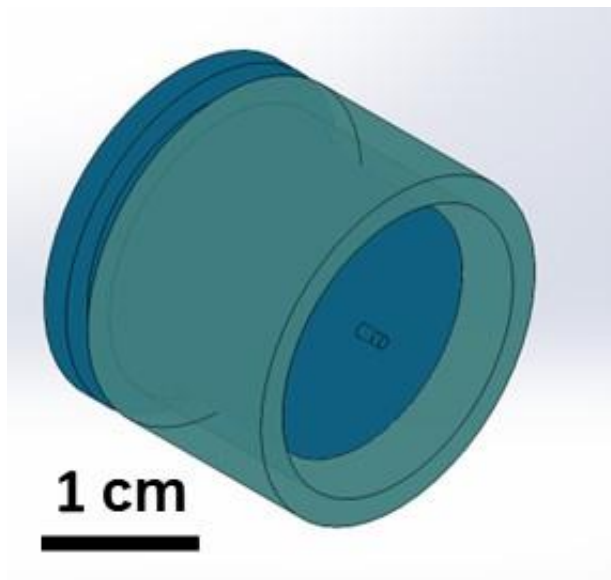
SolidWorks mold design for the rubber insulating the auxiliary electrode.
